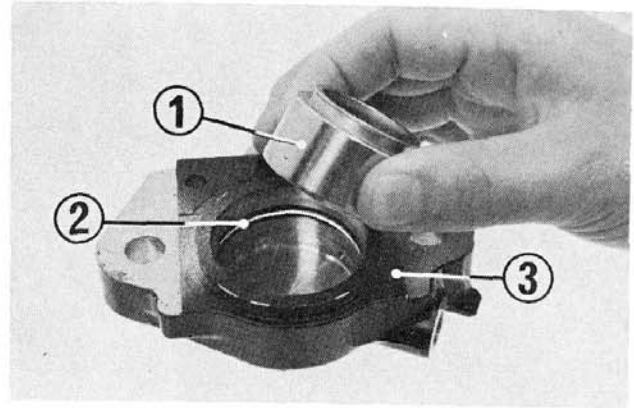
① Piston ② Piston seal ③ Caliper B
